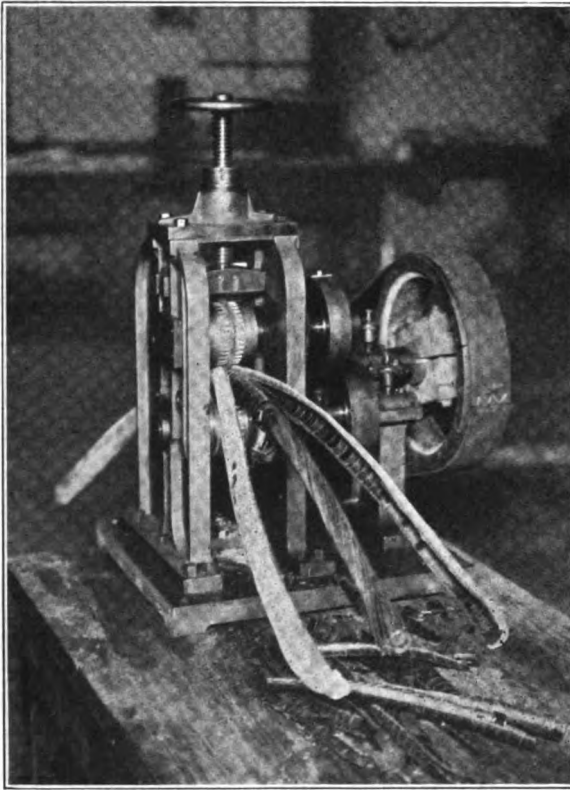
MOTOR DRIVEN CABLE STRIPPING MACHINE
